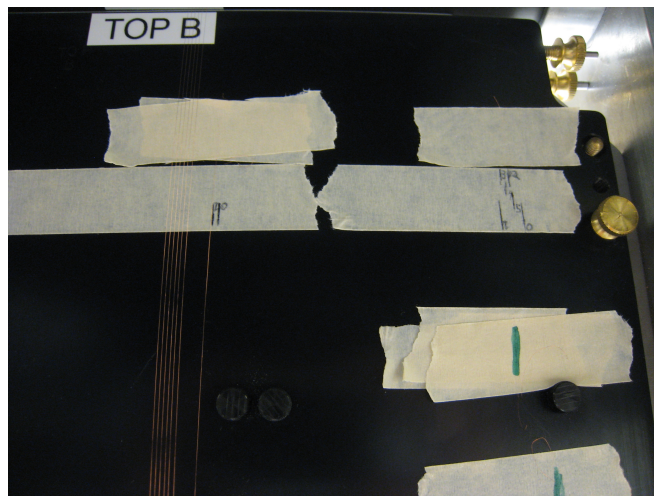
Depiction of how the wire should be taped to the TOP B mountable plate
